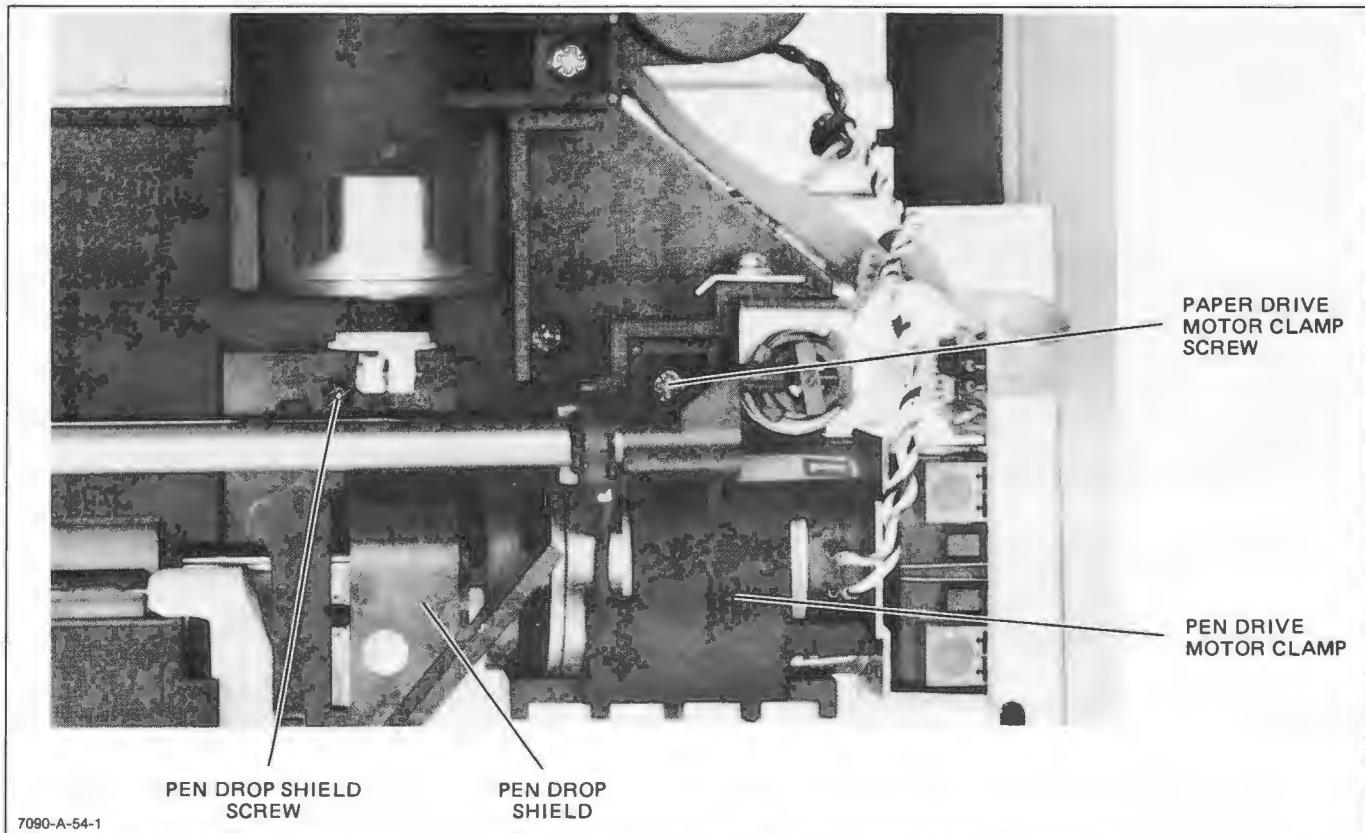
Paper Drive Motor Clamp and Pen Drop Shield
